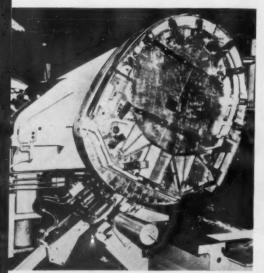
Illustration showing setup for machining of bulkhead fitting for Convair F-102.
